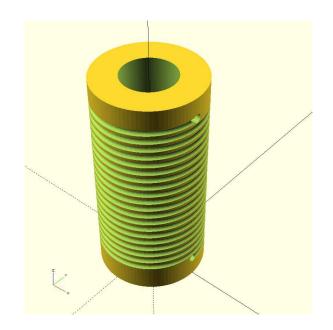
20 turns, #22 wire, .5" diameter, 0.04" spacing
